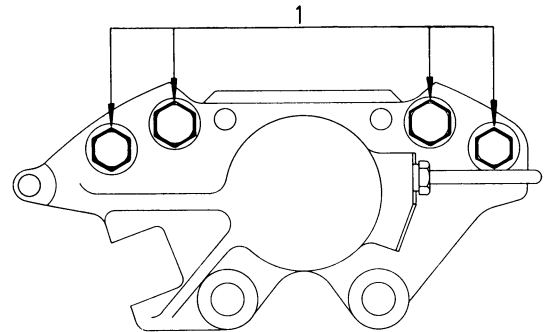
Tightening torques of rear caliper halves (1600 S Cabriolet).
